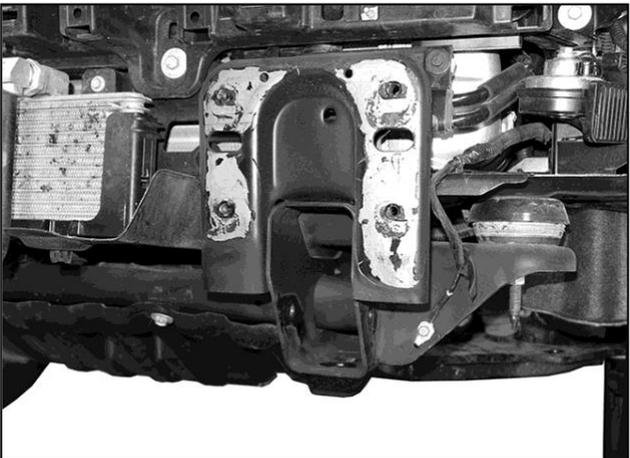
Remove bumper supports attaching outer end of bumper to frame (arrow)
